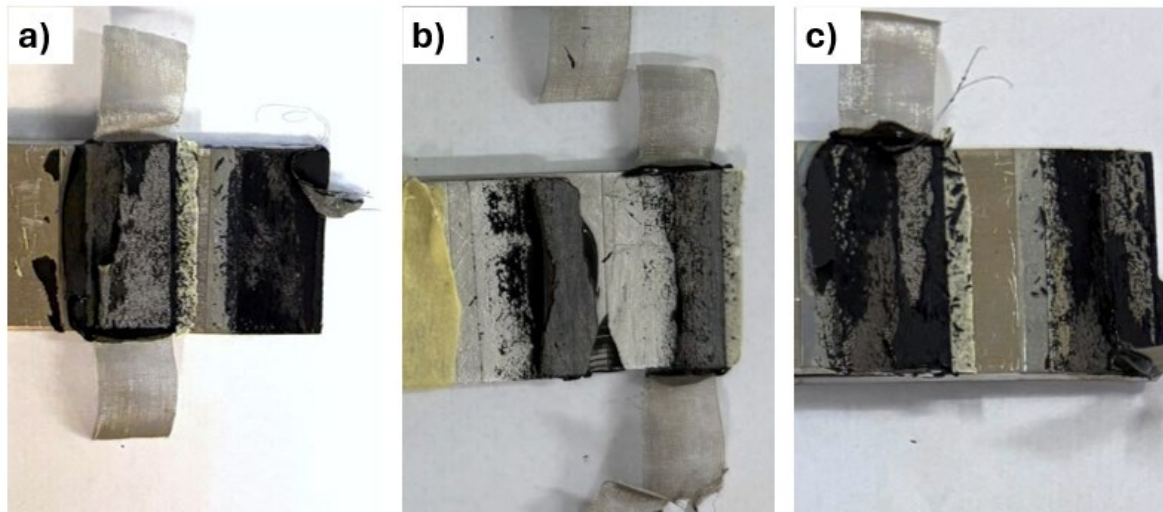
Fracture surfaces analysis of the a) degreased, b) abraded, c) textured rebonded joints.
